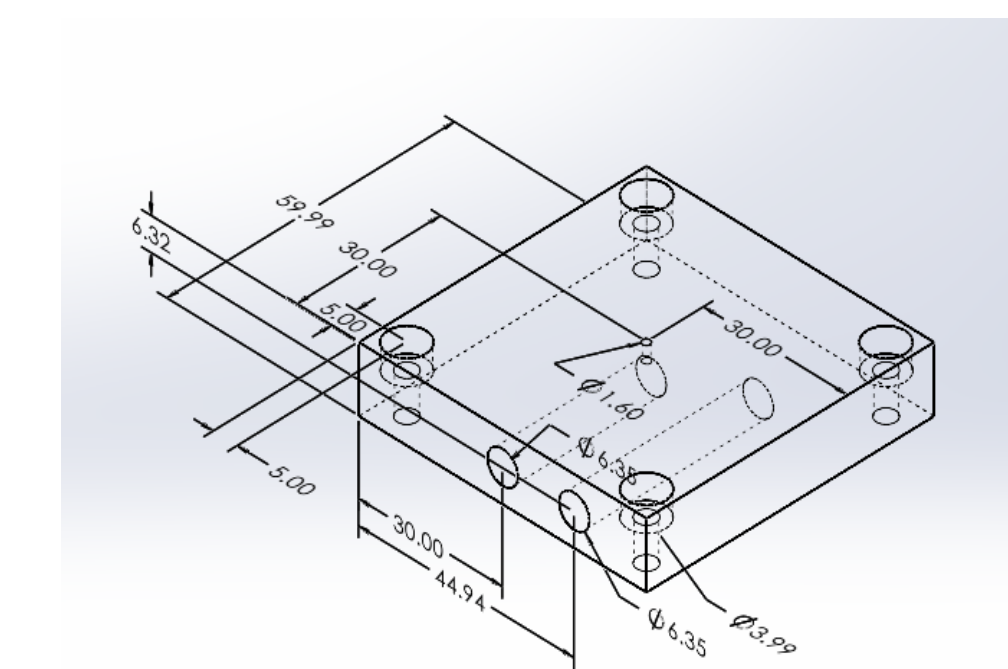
CAD diagram of the sample holder with dimensions shown (units mm)
